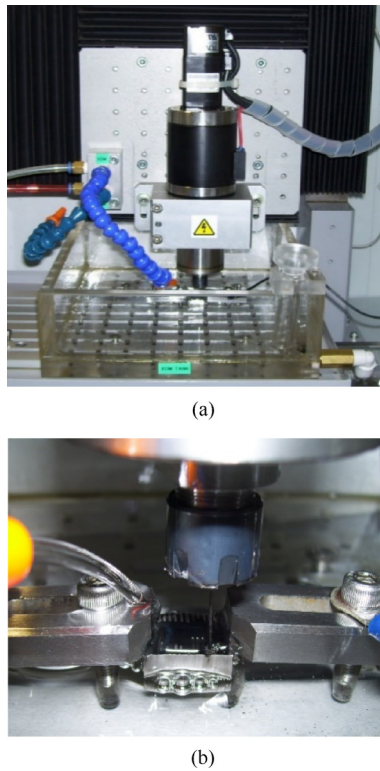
(a) Micro-ED milling experiment setup, (b) magnified view of machining zone.
